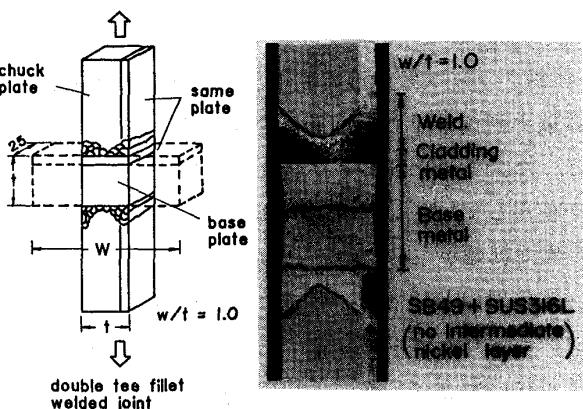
Appearance of tensile test specimen of double tee fillet welded joint
